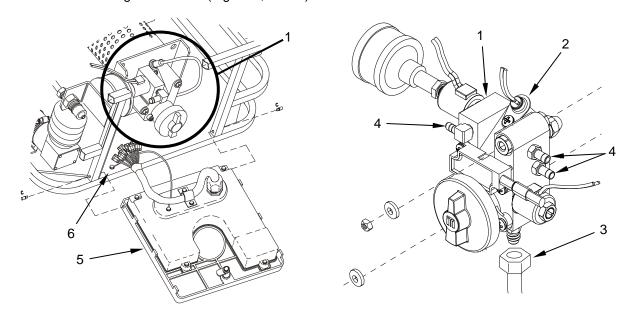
Remove/Install the Fuel Delivery Block Assembly.
